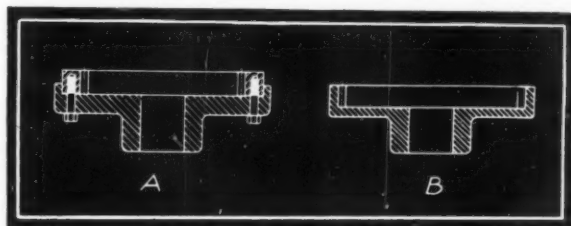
Difficult machining required in cutting internal teeth can be eliminated by casting the teeth straight up against the shoulder
